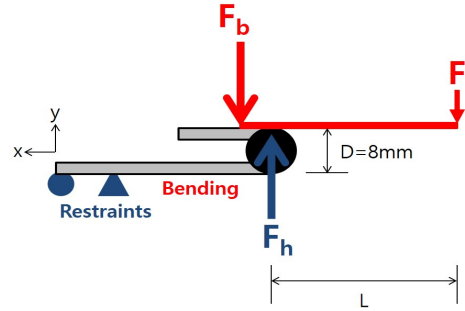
Bending of door lock hasp due to external force F of sharp and strong tool
